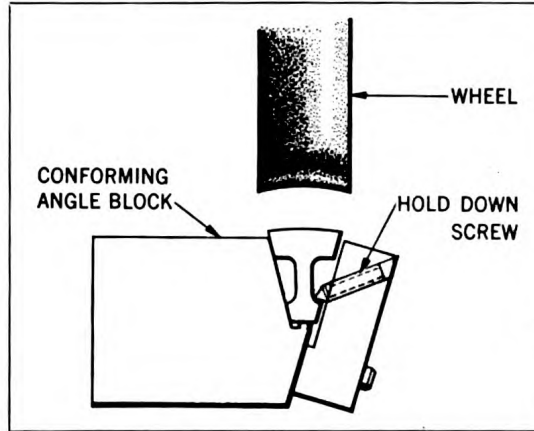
Grinding the radius on the back, which must conform to hole that will receive it.
